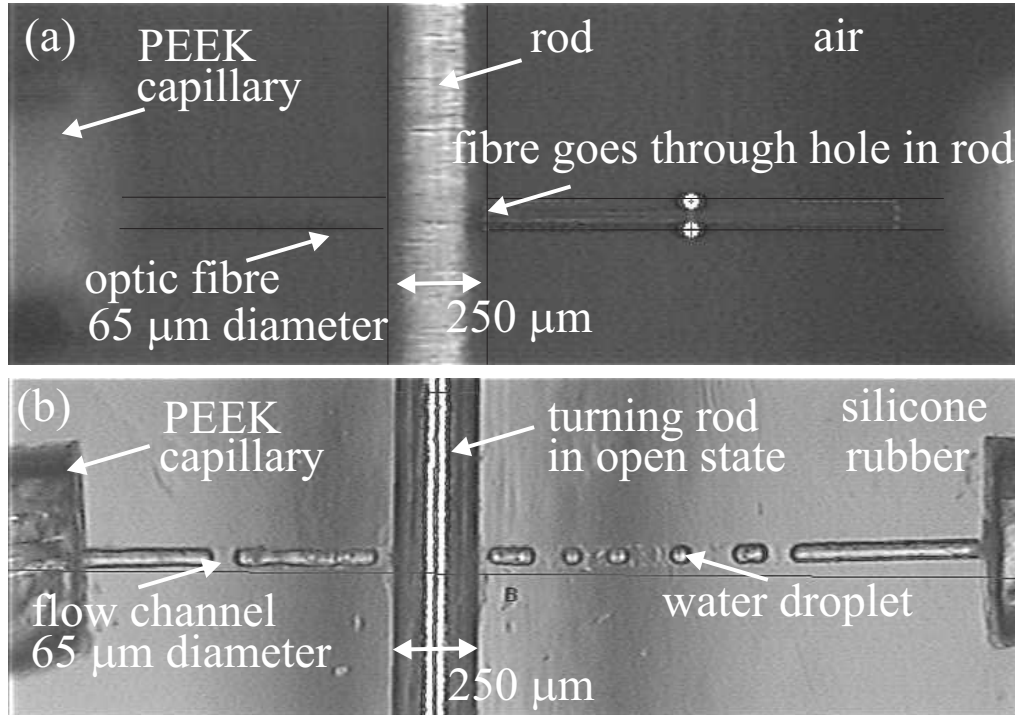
Pictures of channel cross in small molded valve. (a) Mold insert consisting of a rod, and a transverse fibre going through a hole in the rod. Air is surrounding the mold insert. The inner diameter of the PEEK capillary was  $125 \mu m$ . (b) Liquid silicone rubber has filled the cavity, and after curing the optic fibre has been pulled out. Thereby, is created a flow channel, and the rod is now free to turn, and to open and close for a liquid flow. The PEEK capillary has, subsequently, been substituted with a large bore capillary to decrease flow resistance.
